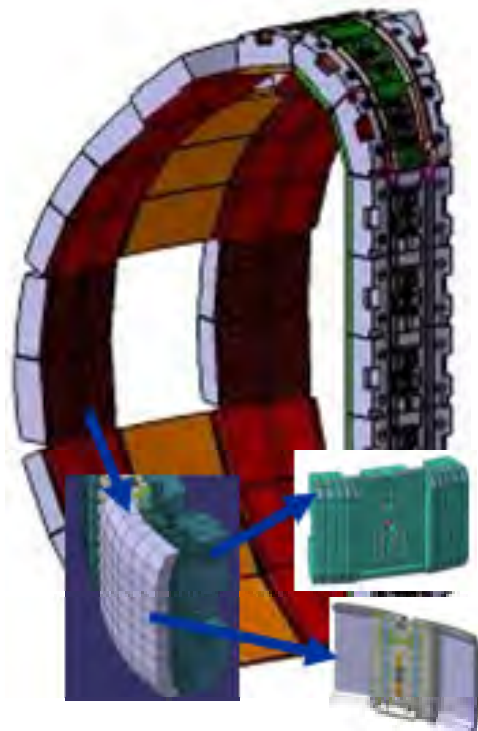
The blanket modules and the water supply manifold from the vacuum vessel side. As one can see, the manifolds are embedded into the blanket modules, but are mounted on the vacuum vessel wall. Also shown in the inset figure on the bottom is a blanket module split into shield module and FW module.
